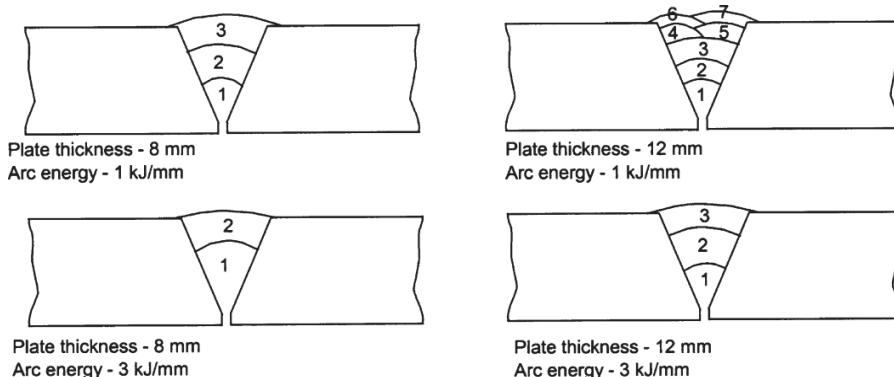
Different scenarios of multi-pass weld runs examined in [5].
